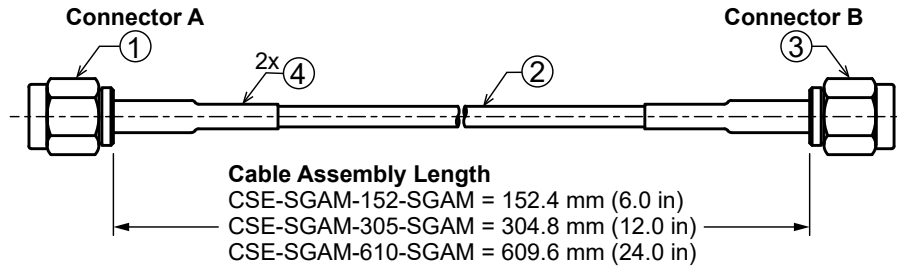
Product Dimensions for the CSE-SGAM-ccc-SGAM Cable Assembly
